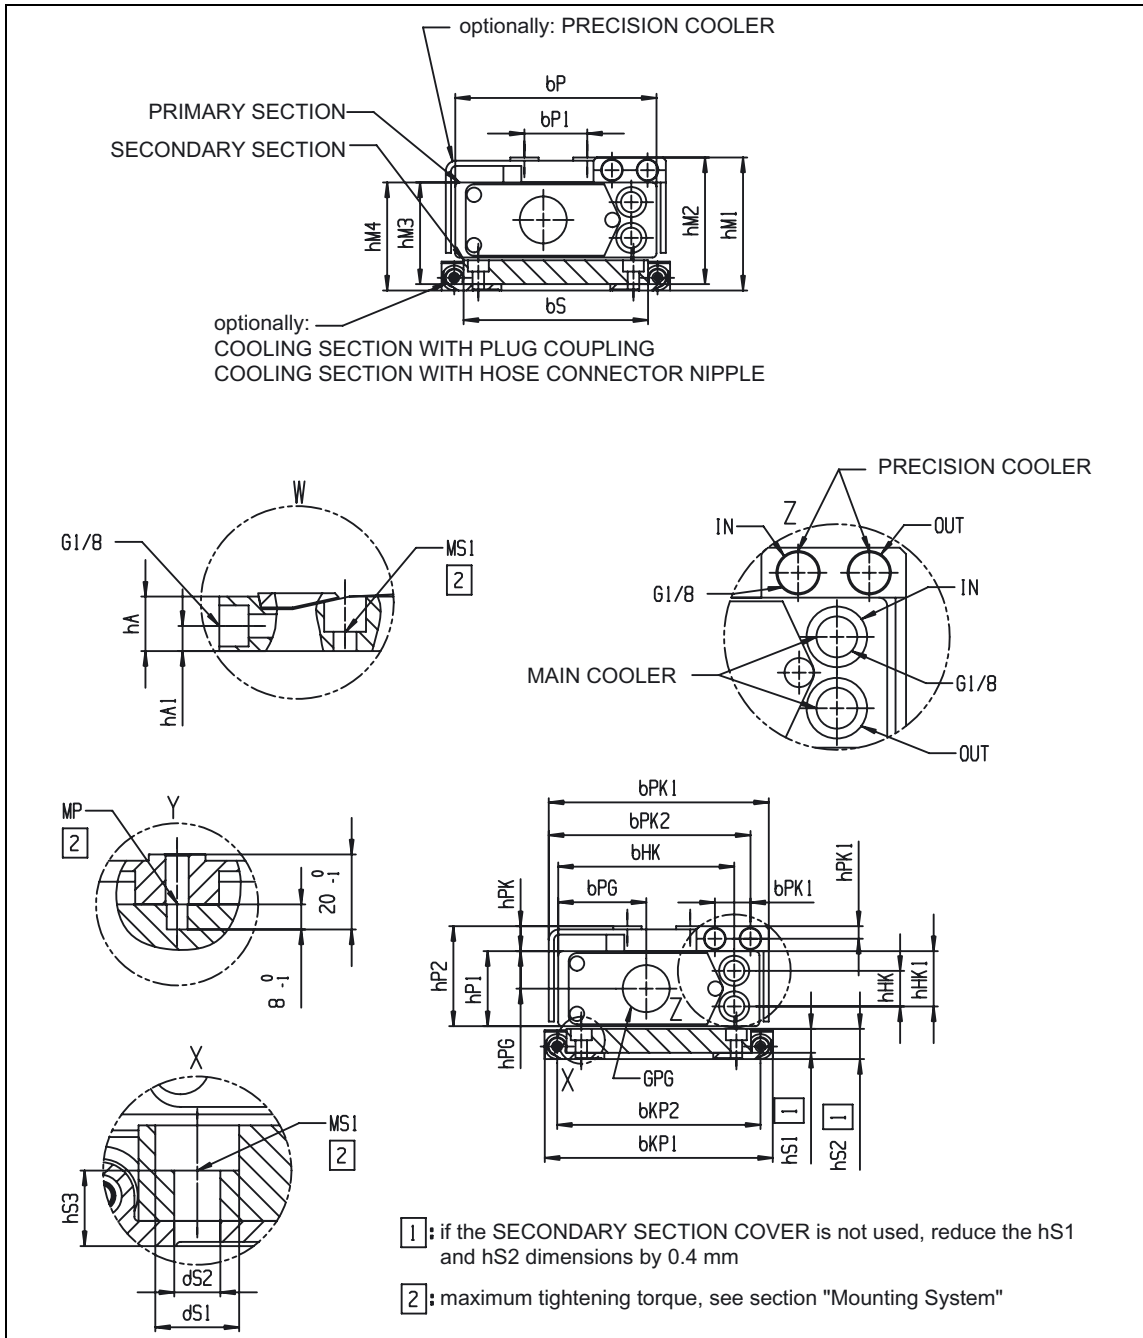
Mounting dimensions for the 1FN3050, 1FN3100 and 1FN3150 motor models: Sections and details
